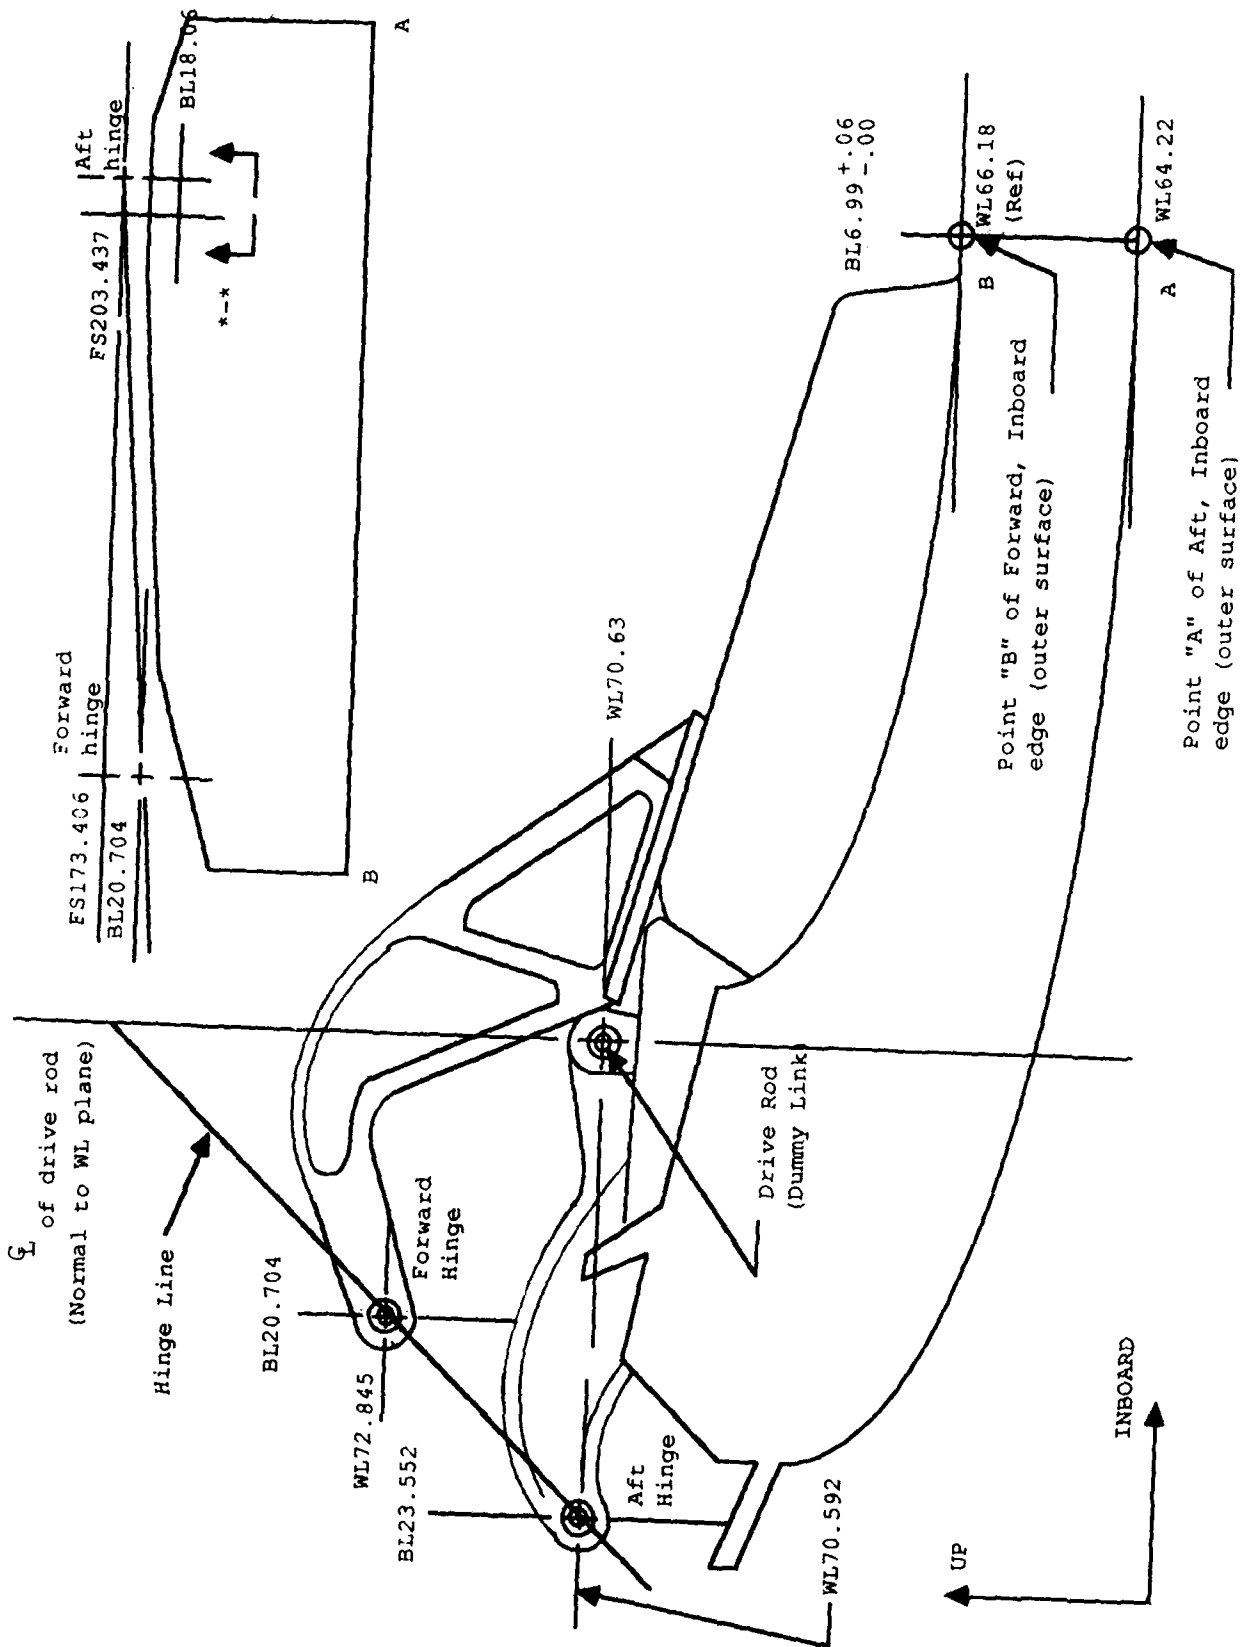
Door Mounting Geometry AFT Door in Closed Position
